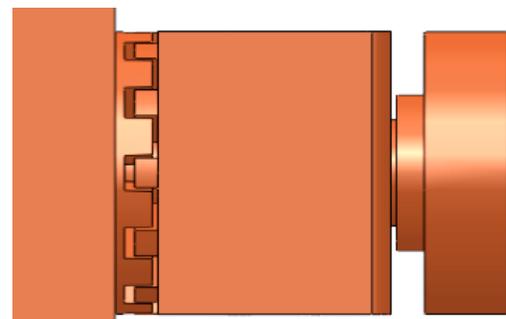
Detail view of mounting clip components: interlocking teeth (left), clip (middle), and spring (right).
